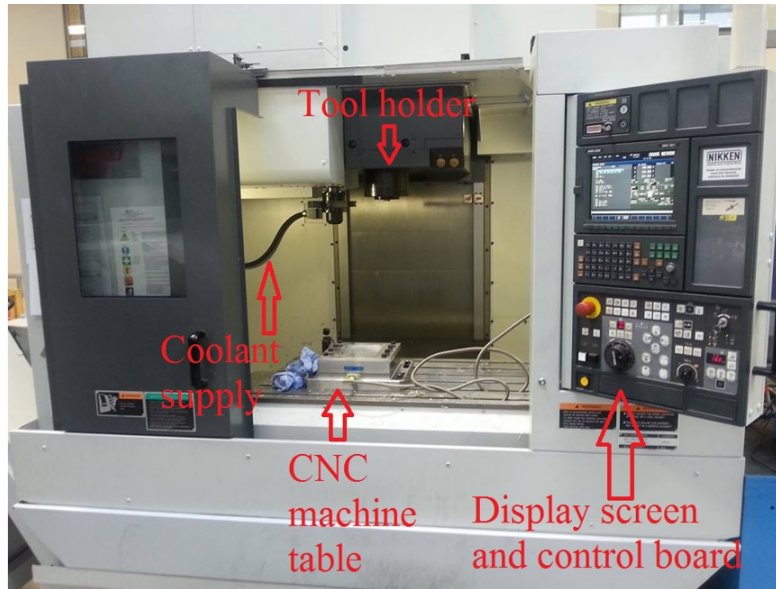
View of the MORI SEIKI SV-500 three axis milling machine
